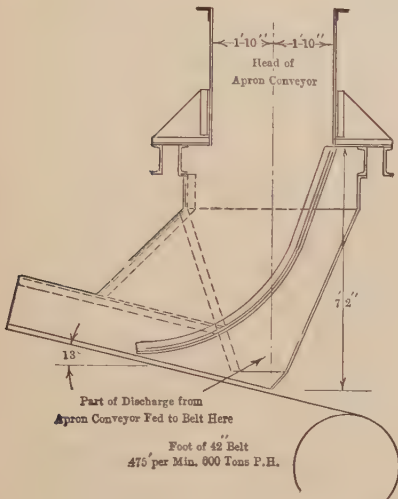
Curved-bottom Chute for Loading an Inclined Belt Conveyor.
